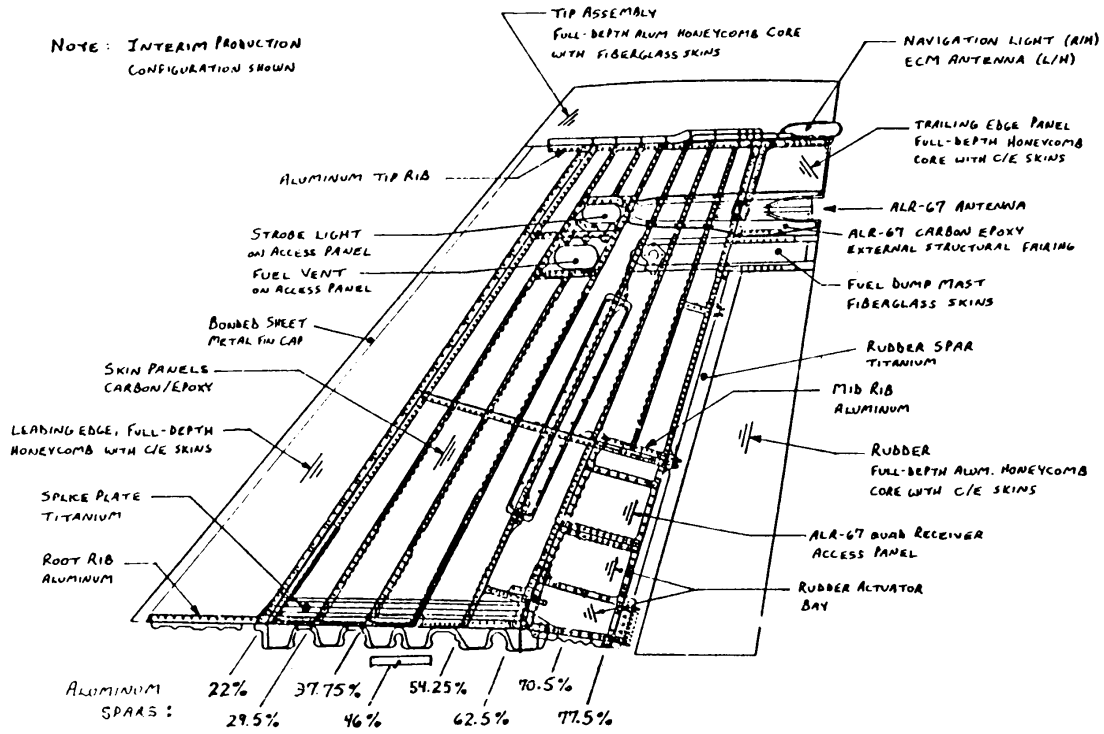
F/A-18 Vertical Tail Structural Arrangement
